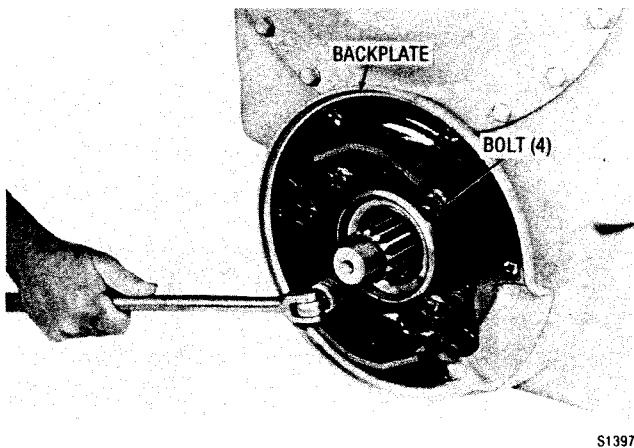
Removing parking brake backplate bolts (-1 models)
